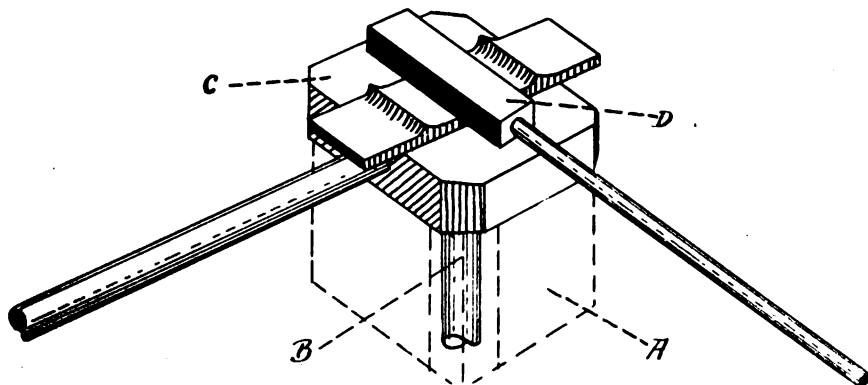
DRAWING OUT THE CENTER OF THE CLAMP
